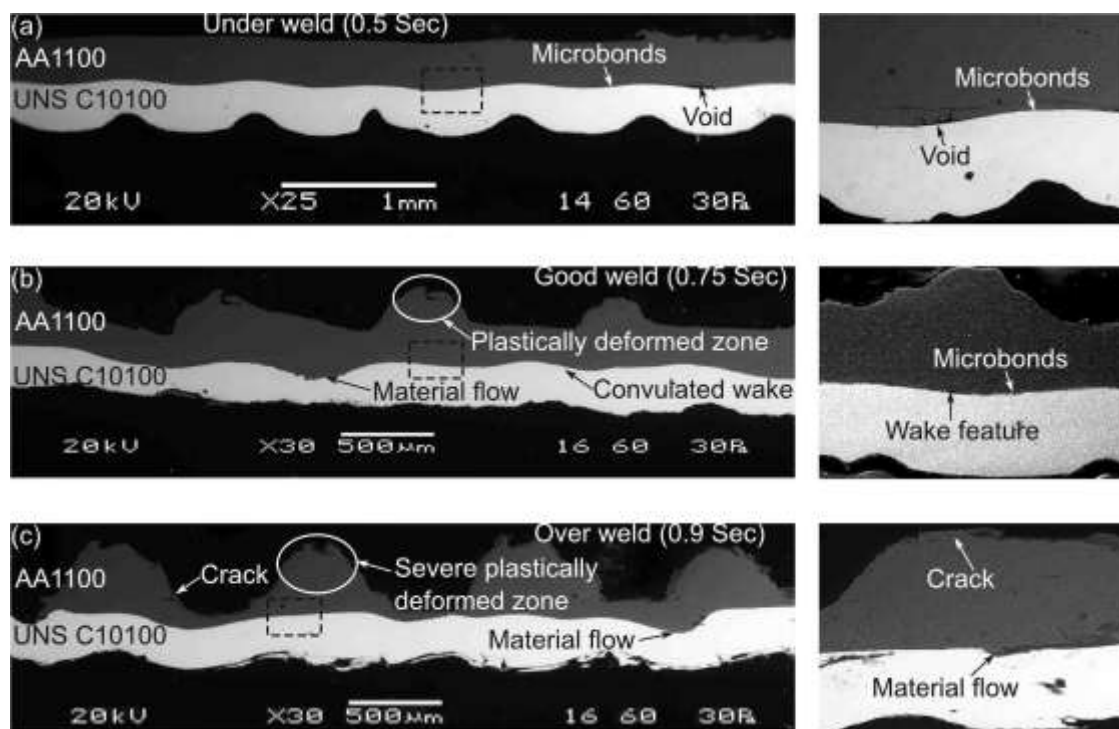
SEM images of different weld conditions a) under weld, b) good weld, c) over weld
